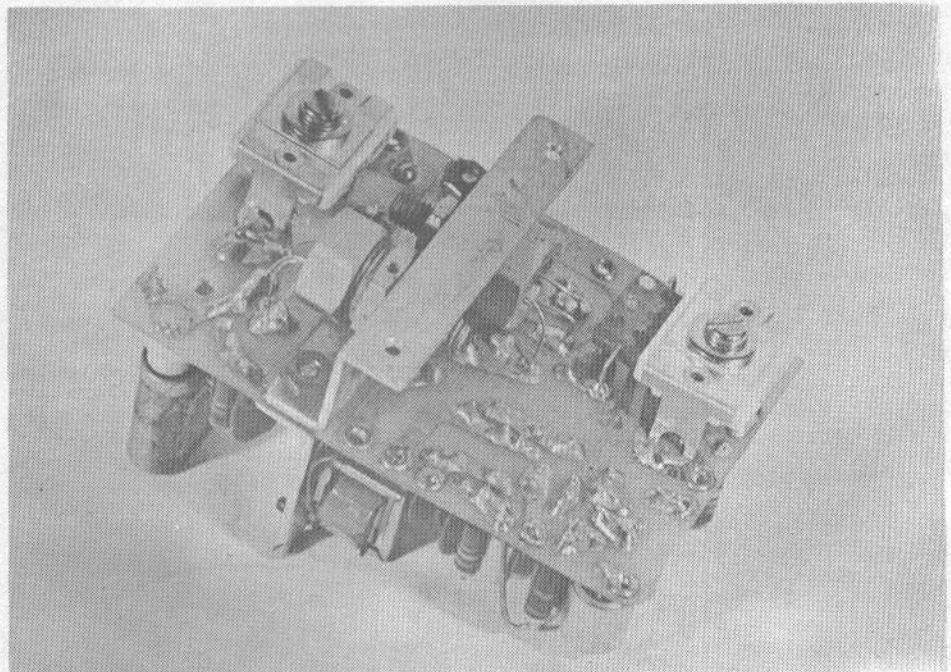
Above. Top view of assembled electronics; Fig. 8--Below. Bottom view.
